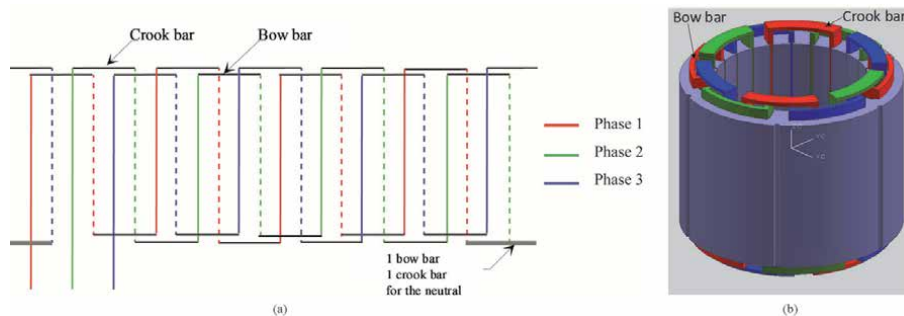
Winding architecture - 20 kW very low voltage motor. (a) Winding layout, (b) 3D CAD view of the wound stator.
